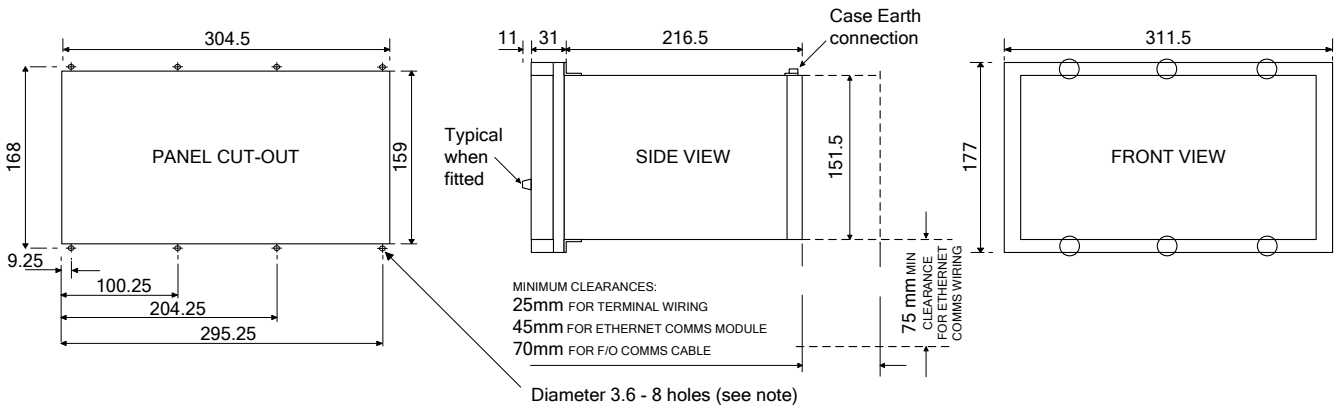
E8 Case overall dimensions and panel drilling details (All dimensions are in mm)
